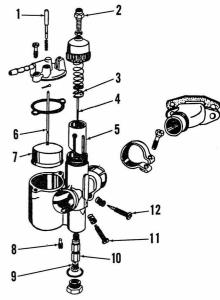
Exploded view of Fisher-Amal carburetor used on 175cc models.
